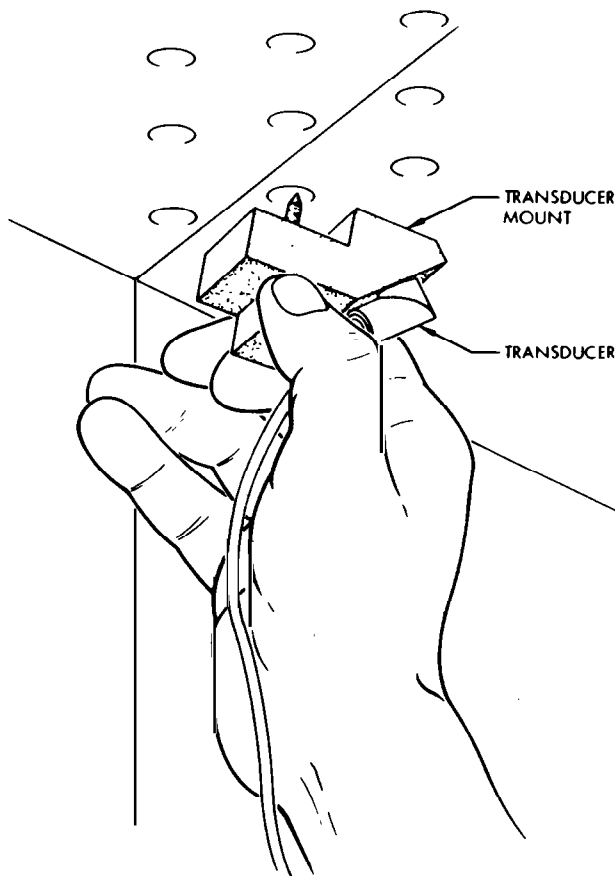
Transducer mount—fastener hole inspection.
